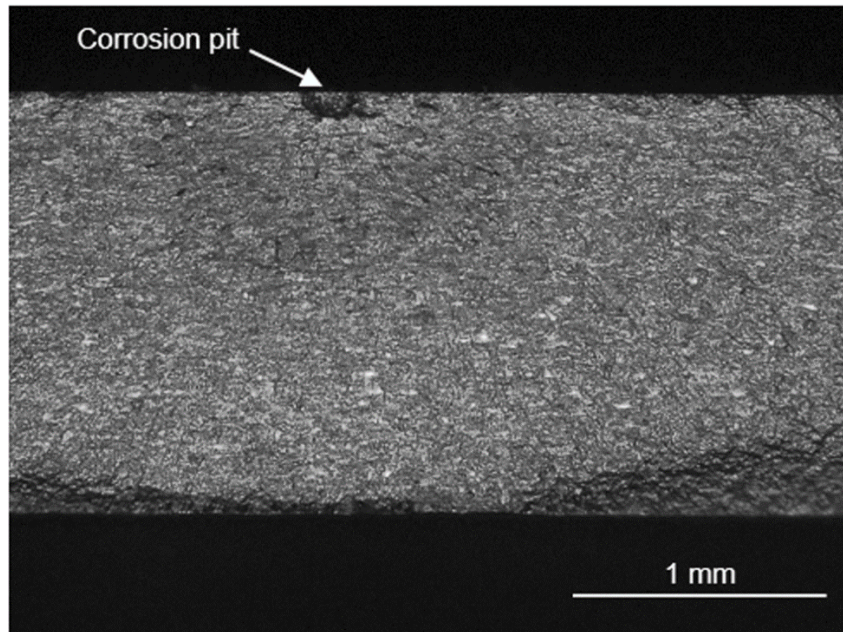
Fracture surface of base material with 96-h corrosive exposure
